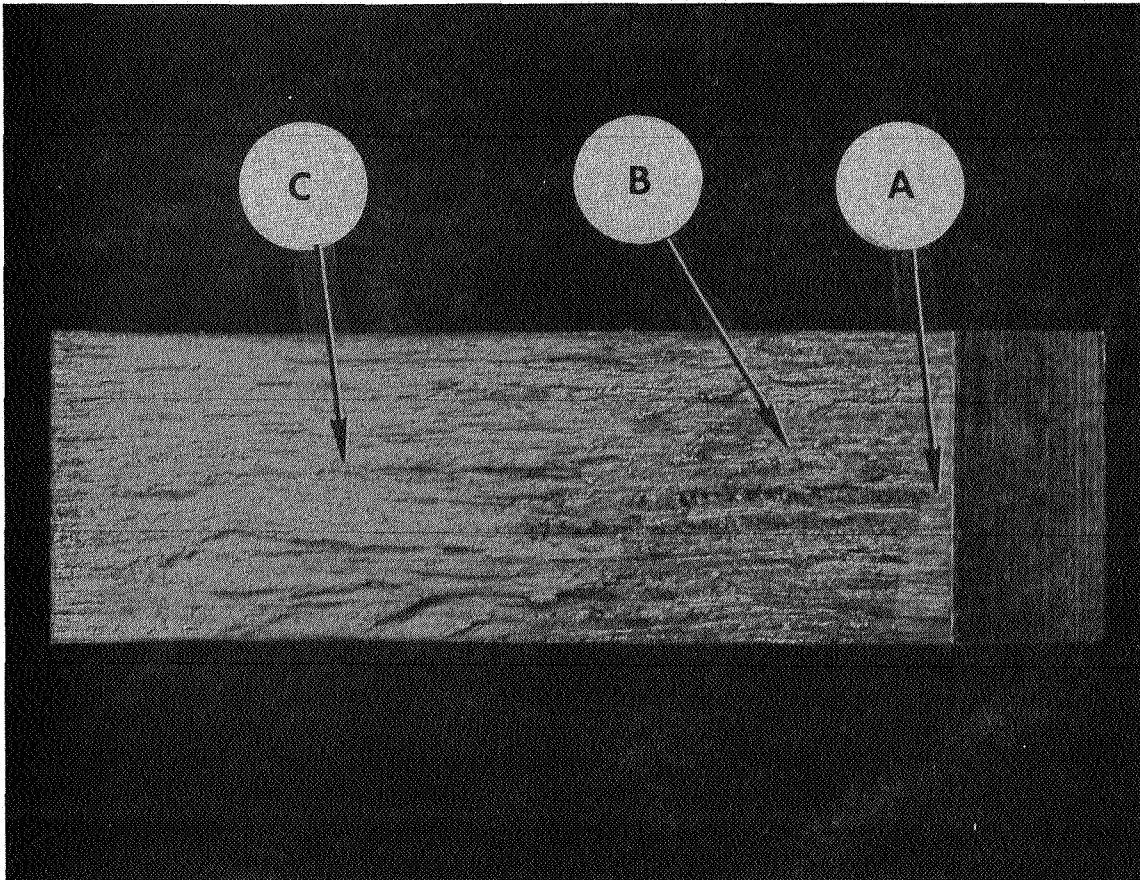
Fracture surface of 0.500" thick notch bend SCC specimen showing fatigue precrack (A), stress corrosion crack growth (B) and rapid fracture (C). Approx. 4x magnification
